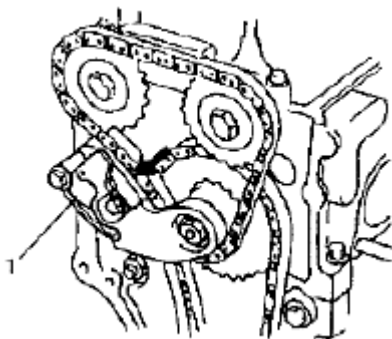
Identifying Timing Chain Tensioner Adjuster No. 2
